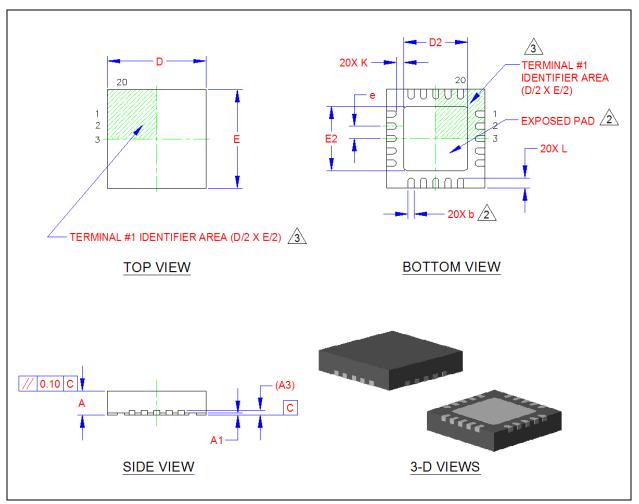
20-Pin QFN 4mm x 4mm Package Drawing
